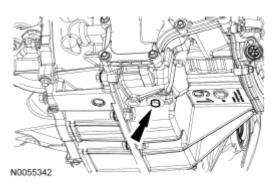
Locating Engine Mount Bracket & Bolts Courtesy of FORD MOTOR CO.
